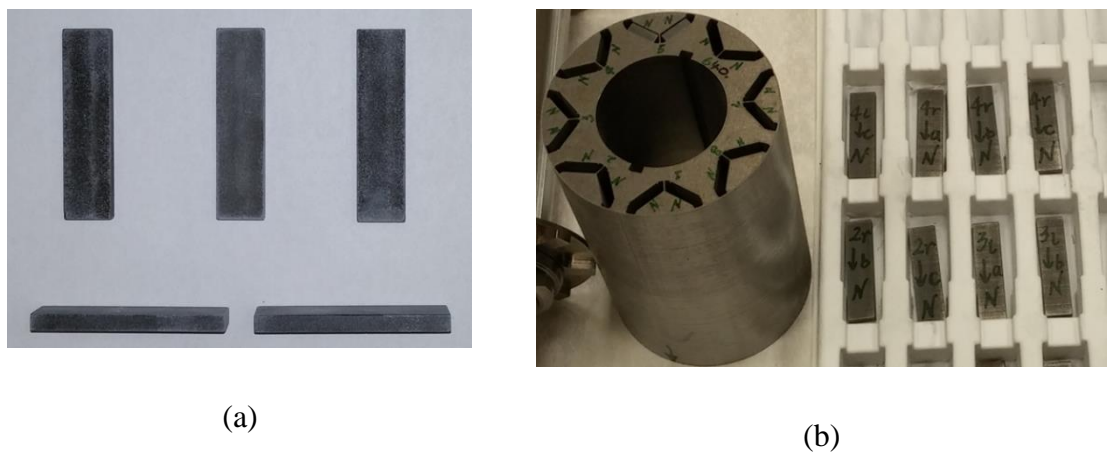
Dy-reduced magnets (a) in front and side views, (b) in the process of being assembled into the rotor stack
